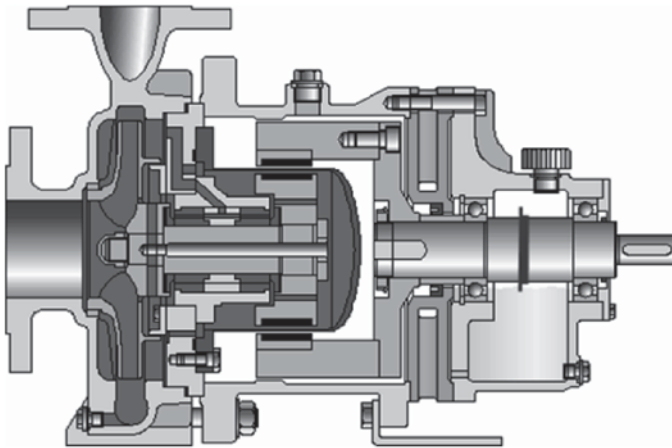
Magnetic drive chemical pump. (courtesy Klaus Union)
